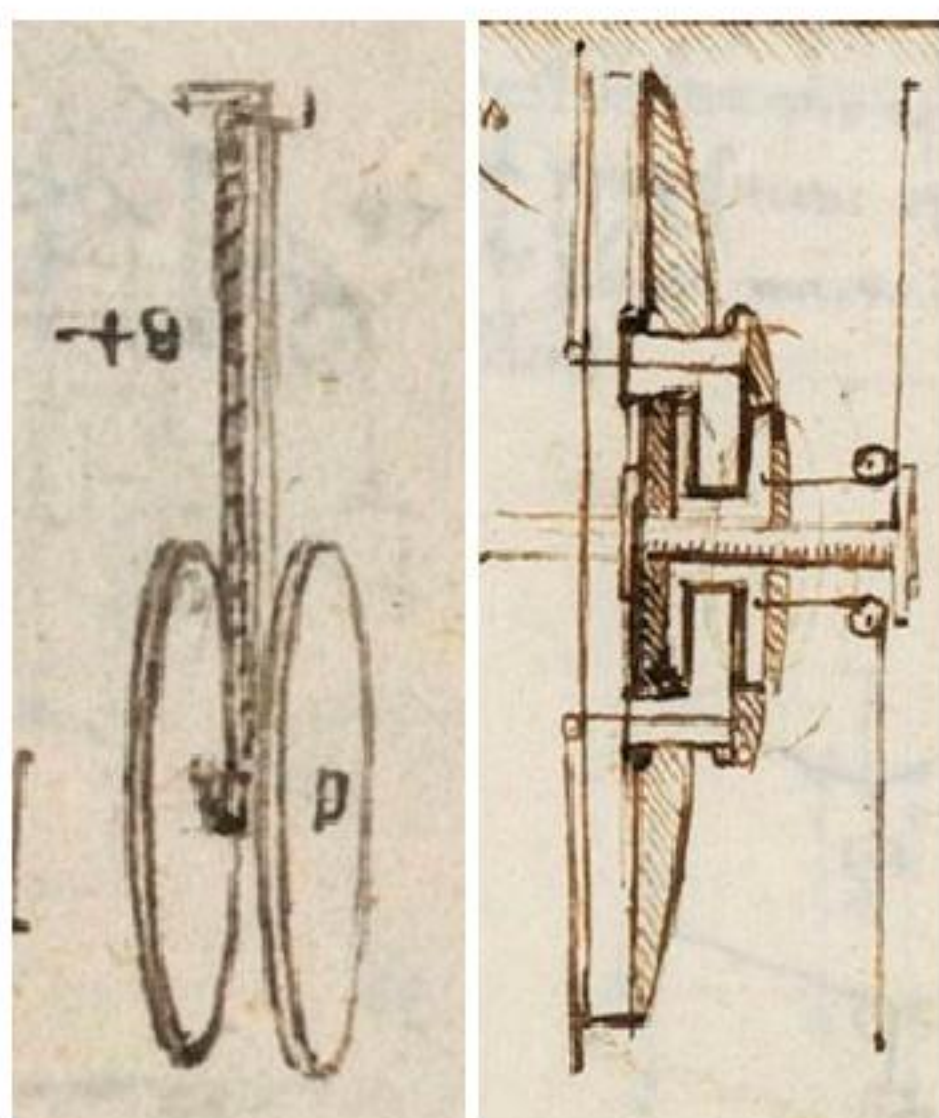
A spool and a method of attaching a spool flange to an arbor
